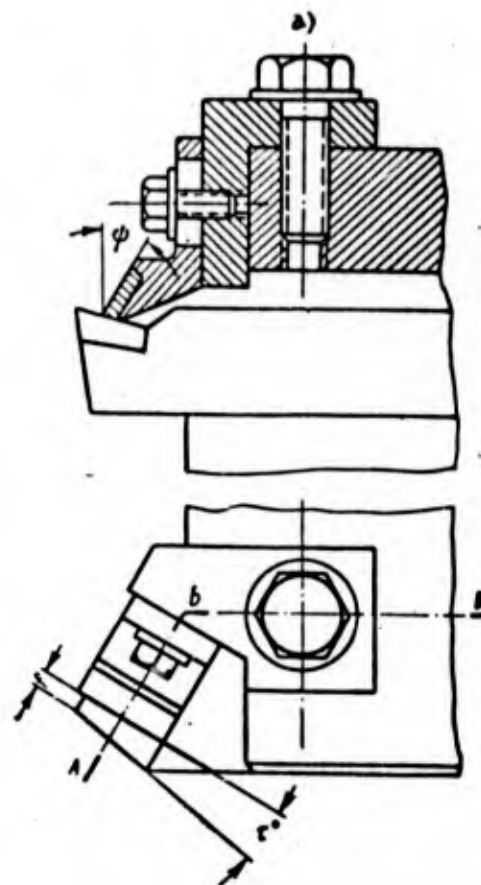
Chip Breaker Designed by the Transport Machinery Design Institute
